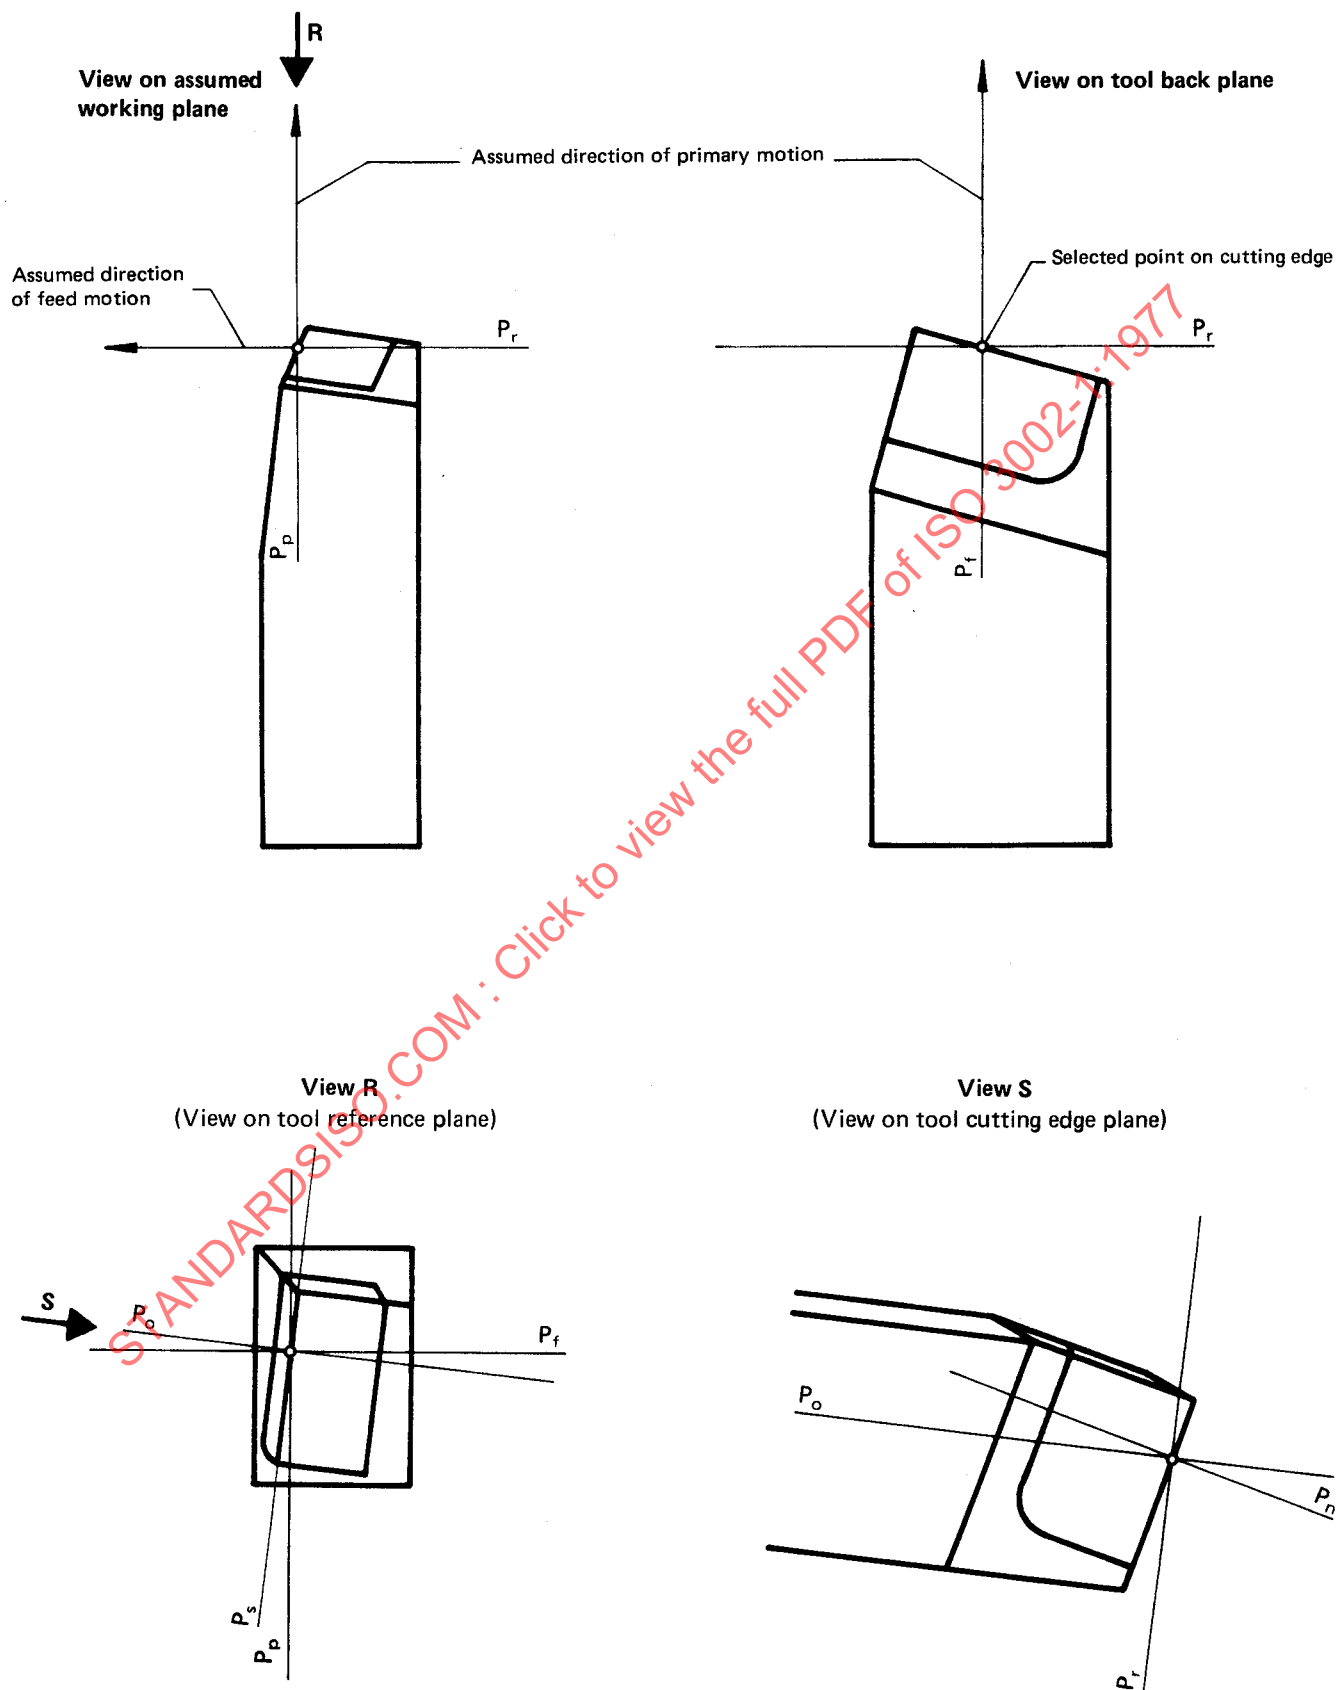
Planes in the tool-in-hand system — Tangential turning tool
